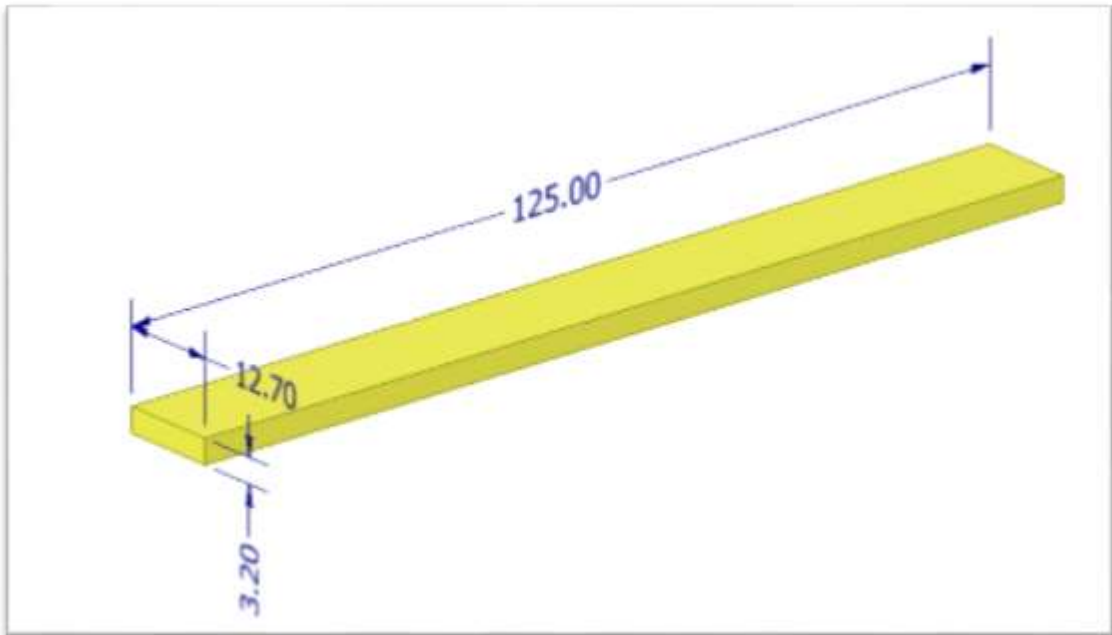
Specimen dimensions for flexural test (ASTM D790)
